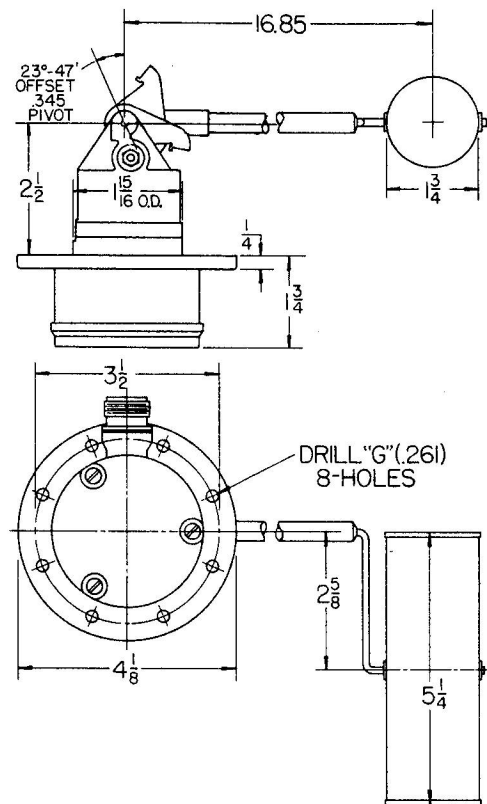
(Sheet 3 of 4 Sheets). General Dimensions
